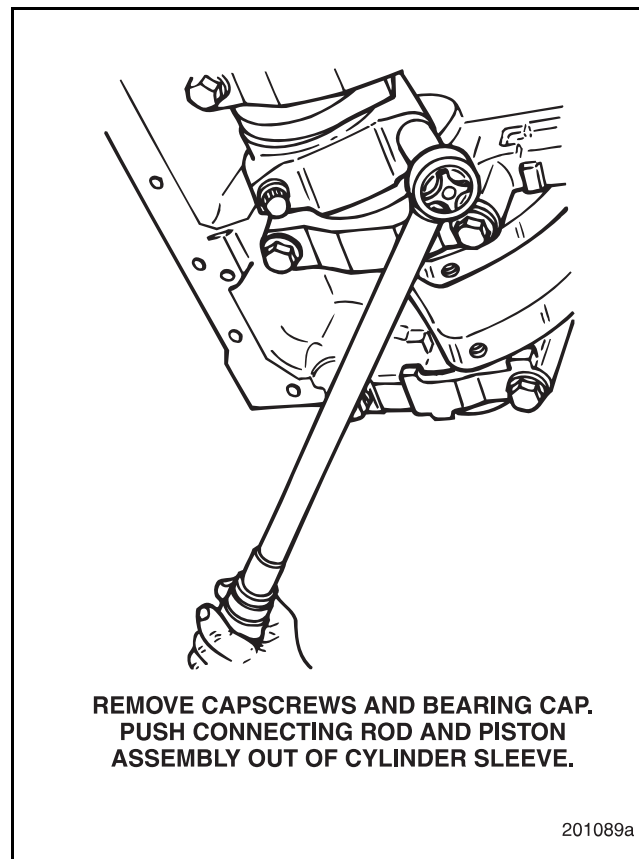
Piston and Connecting Rod Assembly Removal
